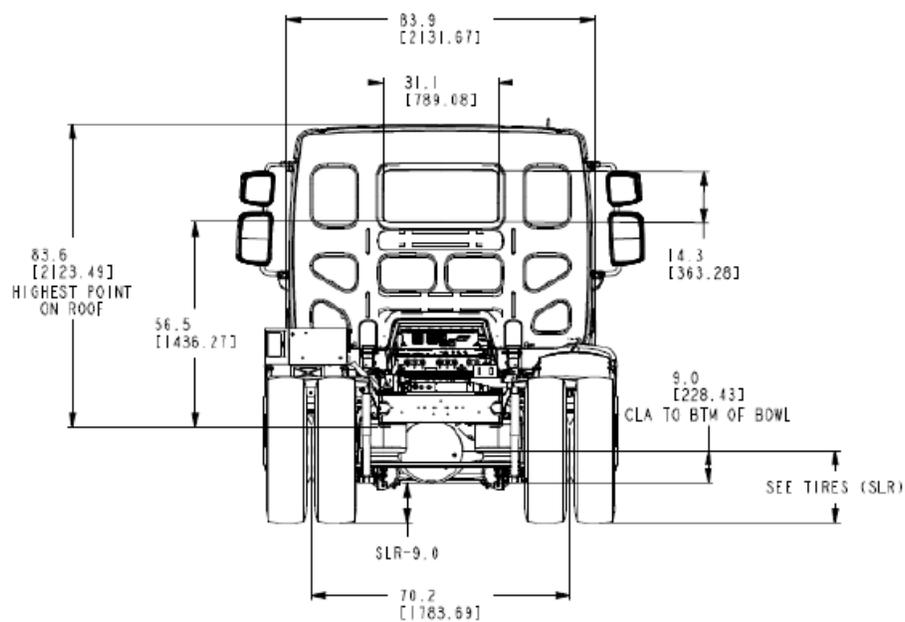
Model 220 BEV Laden Rear View: Width and Ground Clearance Measurements: Inches (mm).
